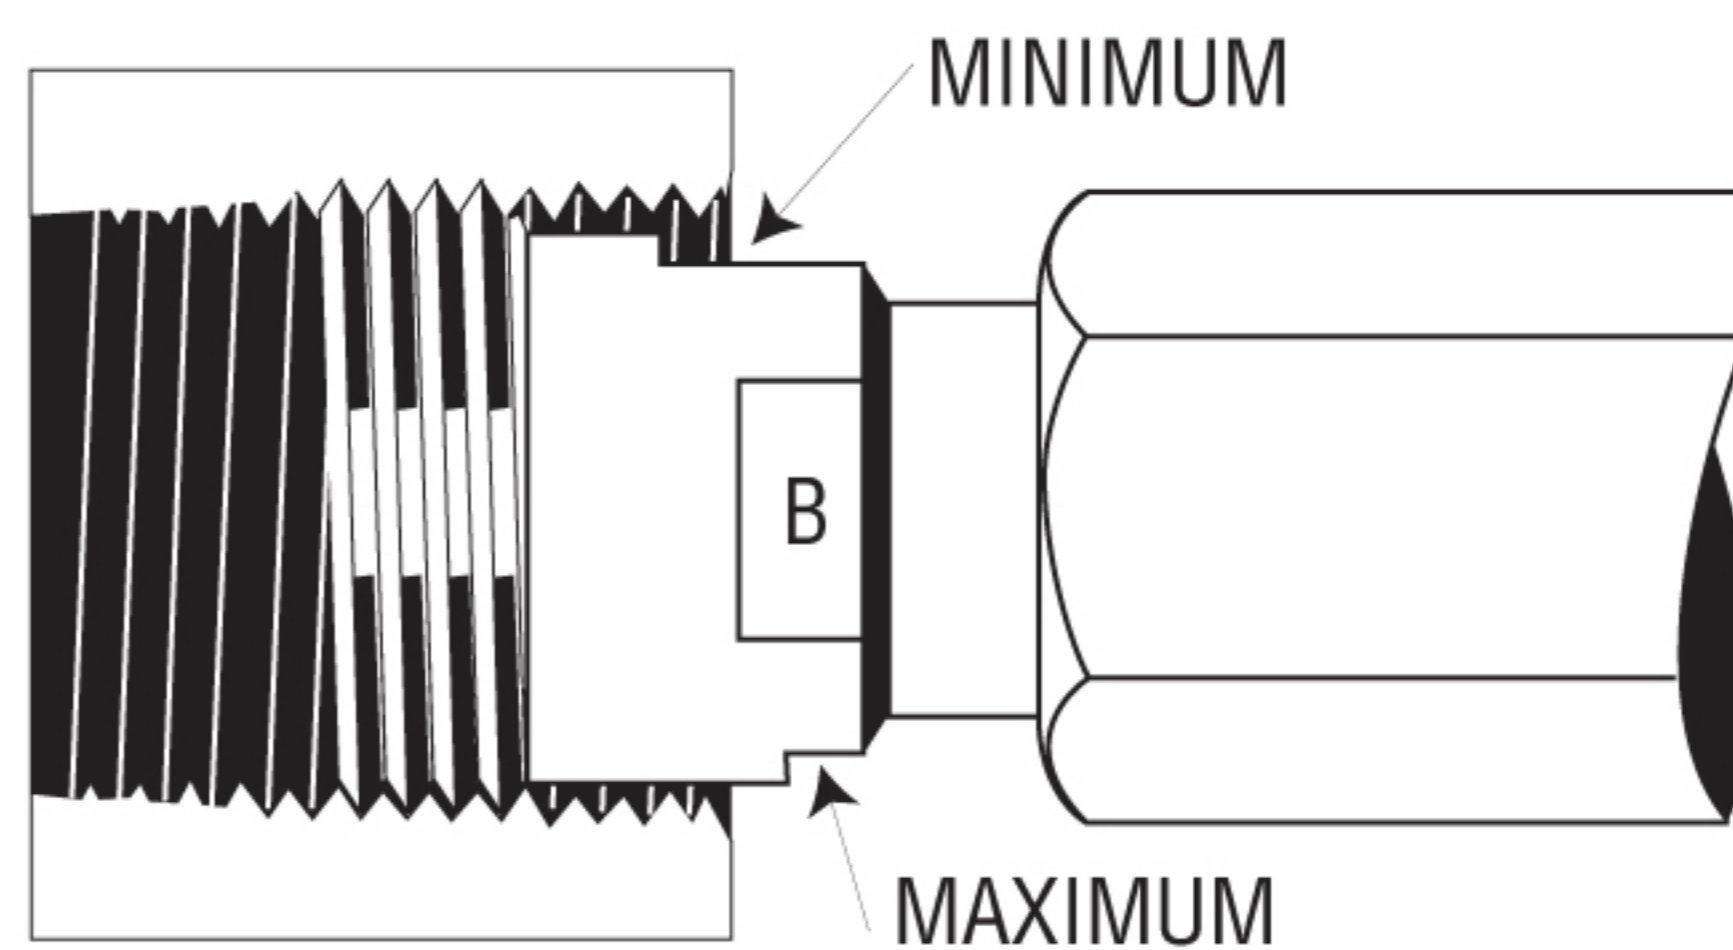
Gaging internal American National Taper pipe threads with working gage. When the internal thread is chambered, the gaging point shall be the intersection of the chamber and the pitch cone of the thread.
